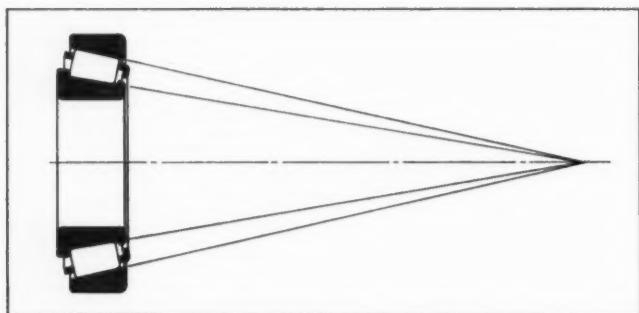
Diagram Illustrating Basic Principle of Tapered Roller Bearing Design
